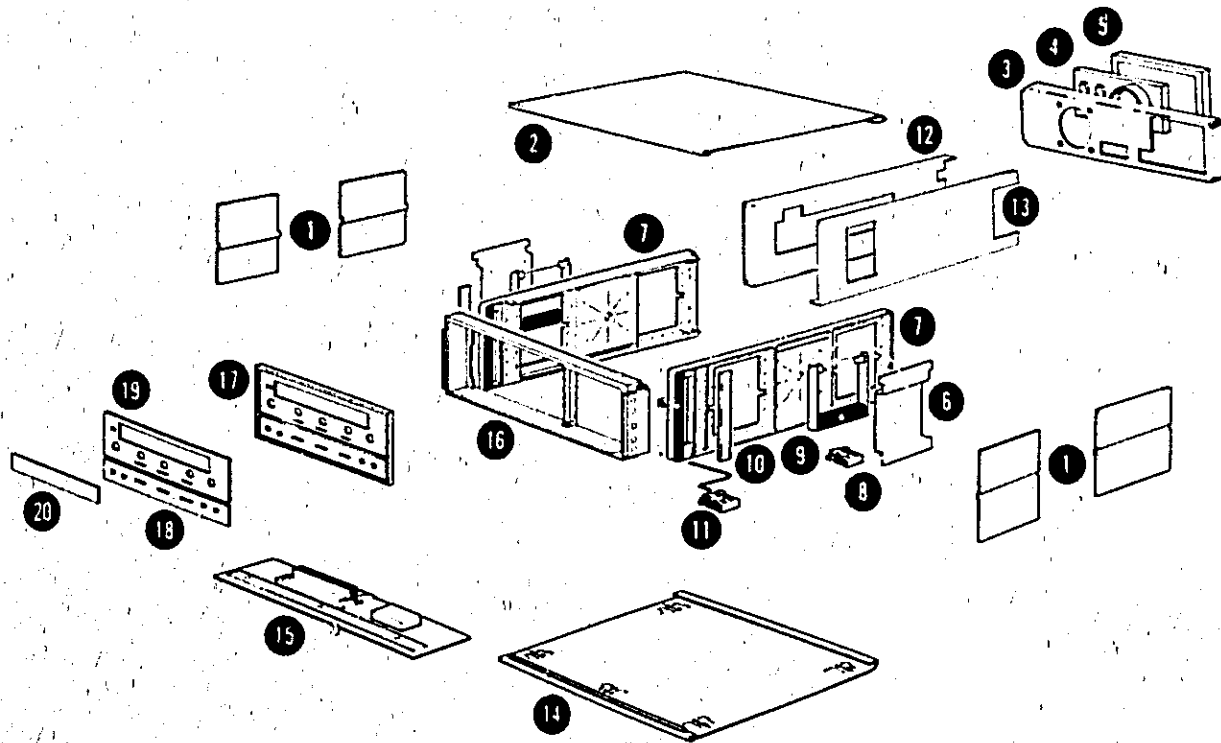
Front Panel Assembly, Parts Locations (4 of 4)
